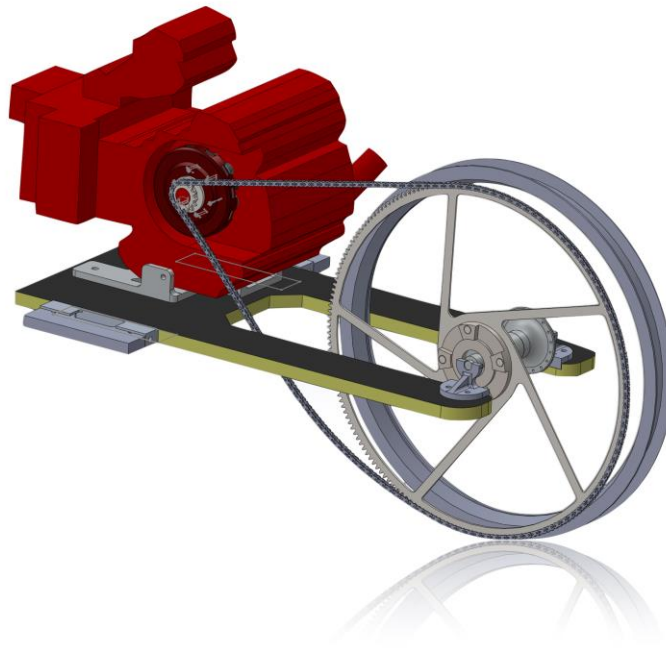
Full assembly of the redesigned 2018 Cal Poly Supermileage Vehicle drivetrain
